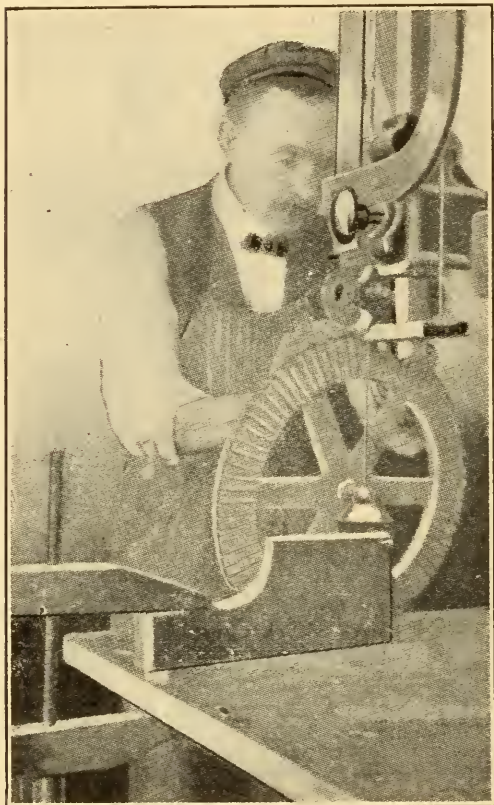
CUTTING BEVEL GEARS ON A BAND SAW.
